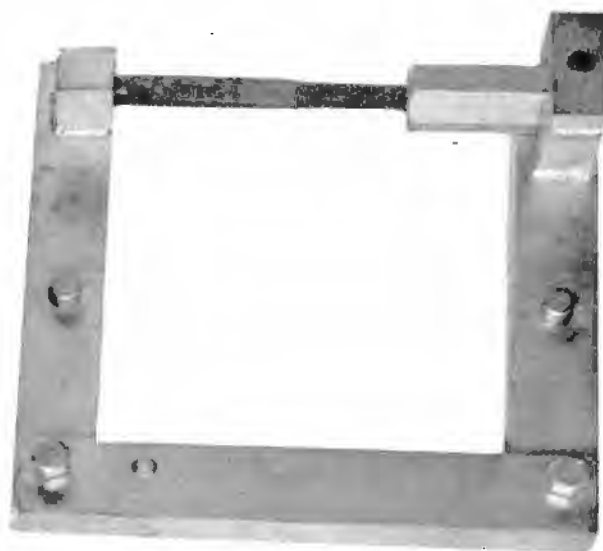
Axle and Propeller Shaft Service Tools (Sheet 1 of 2)
